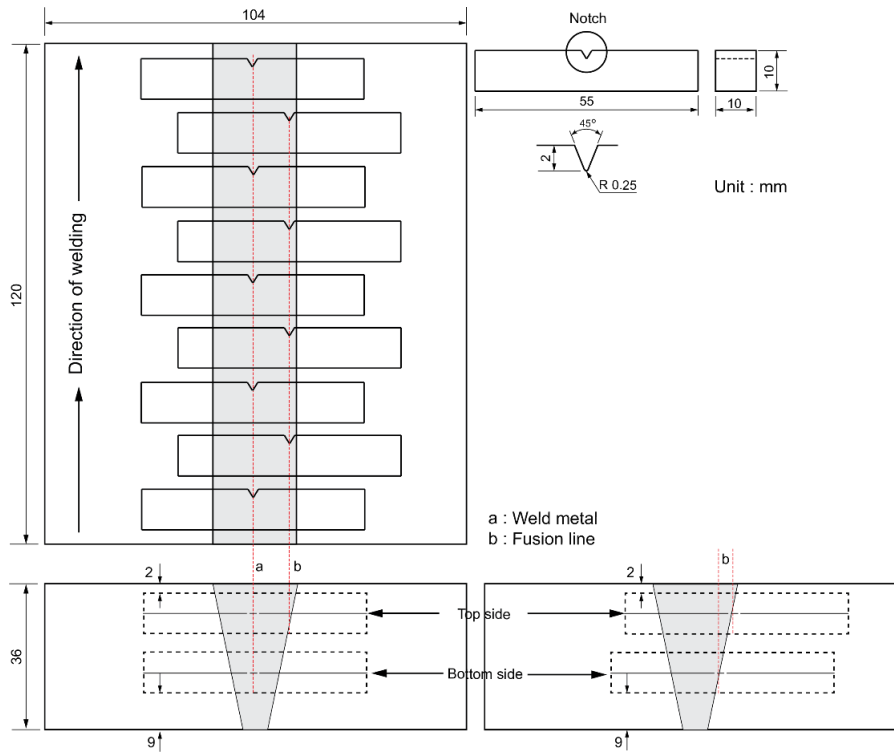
Cut-off plan for V-notched Charpy specimen.
